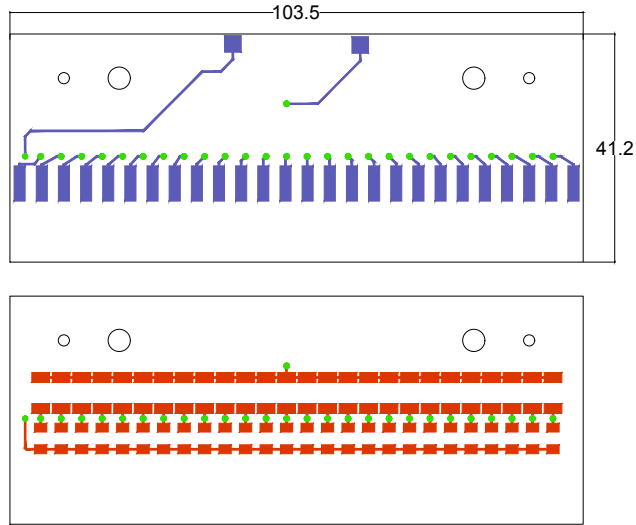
Anode plane circuit board. Dimensions in mm.
